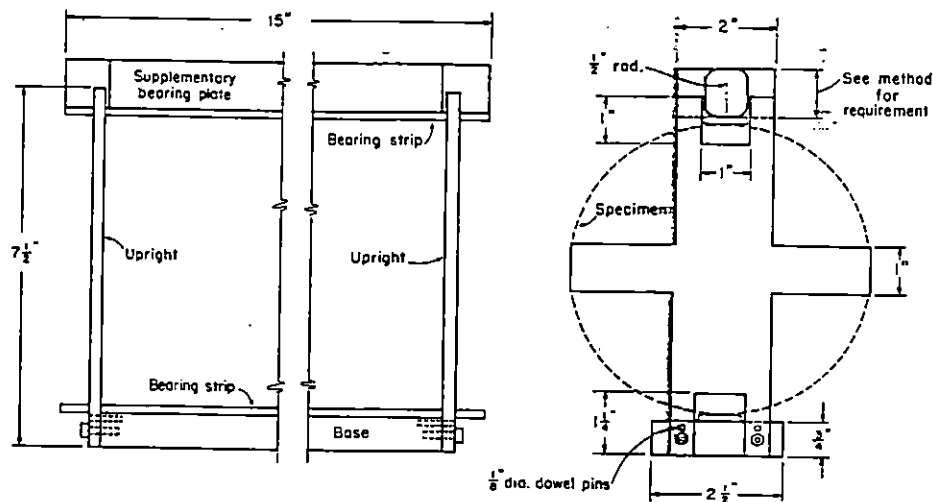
Detailed Plans for a Suitable Aligning Jig
